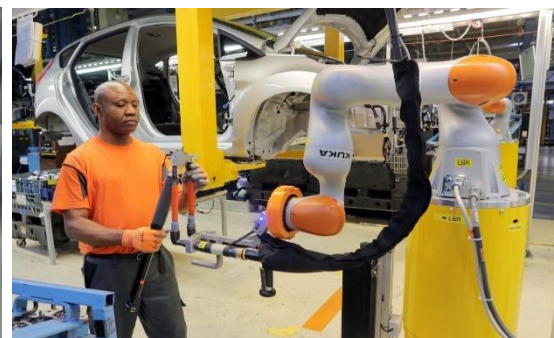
, BMW Bevel Gear Assembly ⁴¹
